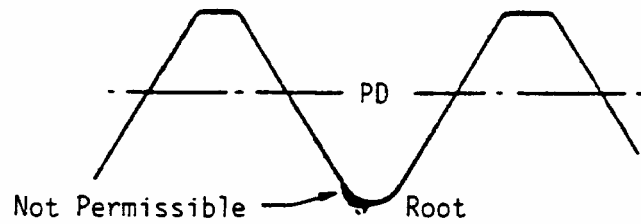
ROOT DEFECTS, ROLLED THREAD
